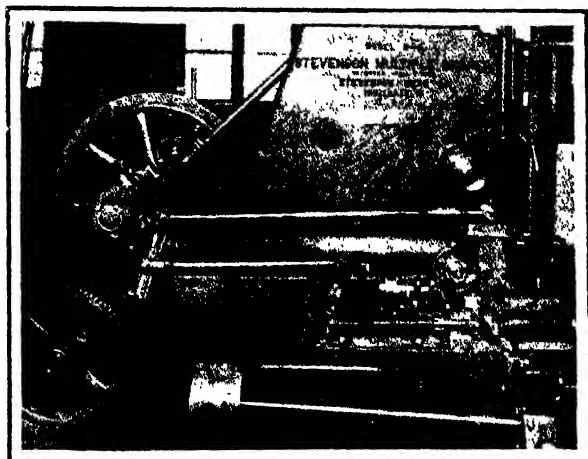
Relief of Tools Is from Cam on Crankshaft, at Left
